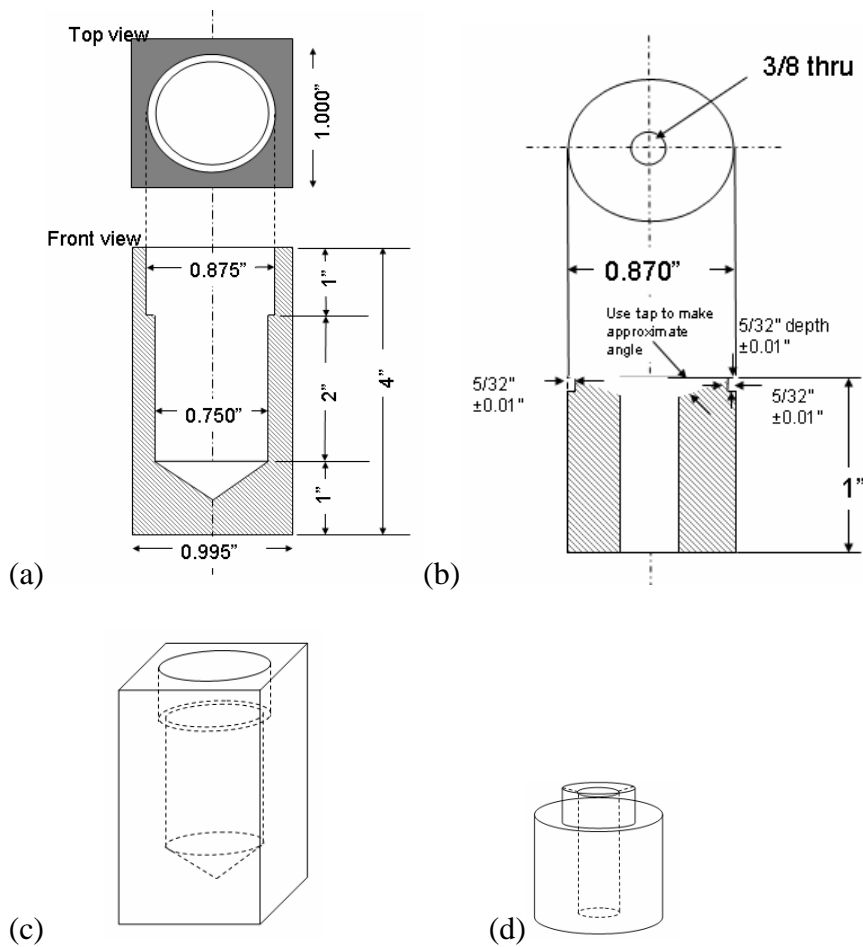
4" Can with cap for powder filling, for mc Cu powder (a) dimensions of the can, (b) dimensions of the plug, (c) isometric view of can, (d) isometric view of plug.
